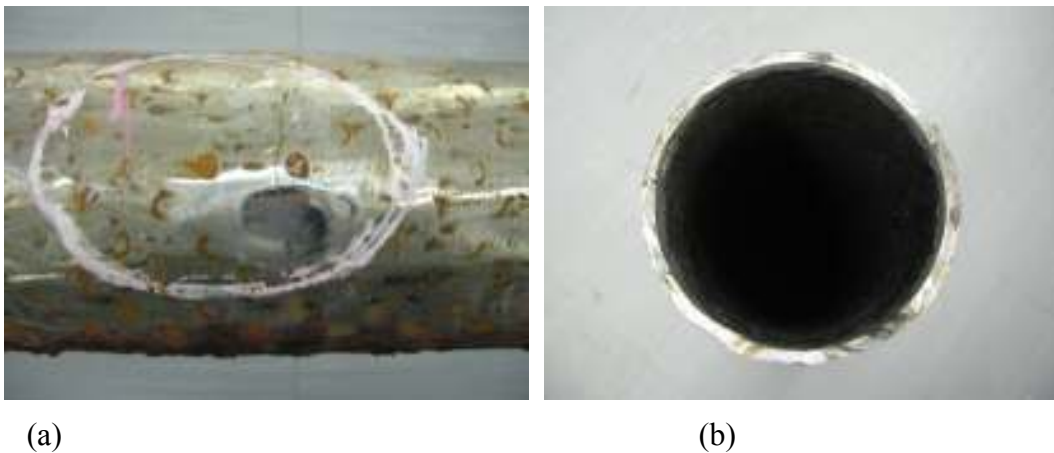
Photographs showing: (a) circumferential single crack; and (b) deposited black layer on internal surface.
